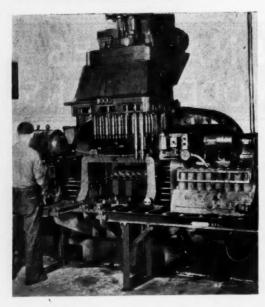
The cylinder blocks an moved from the conveyor directly into the fixture on the machine table.
